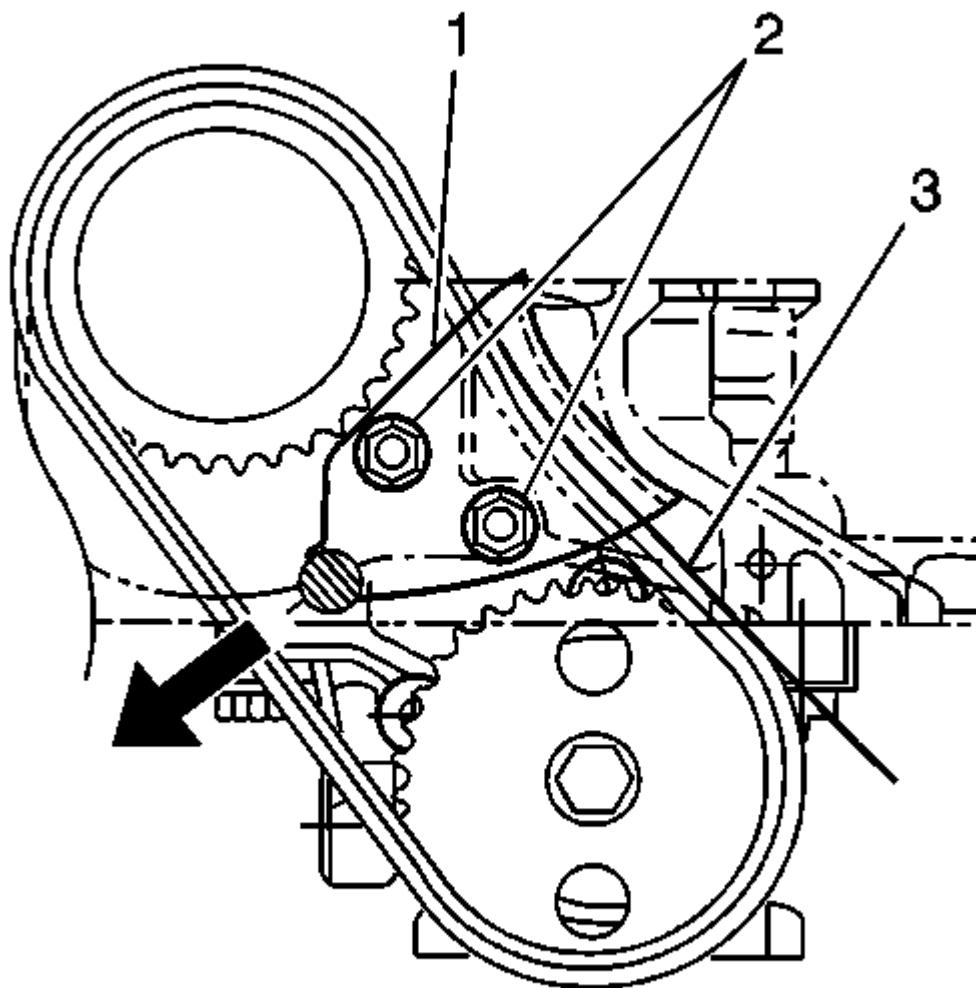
View Of Oil Pump Chain Guide, Feeler Gauge & Nuts
